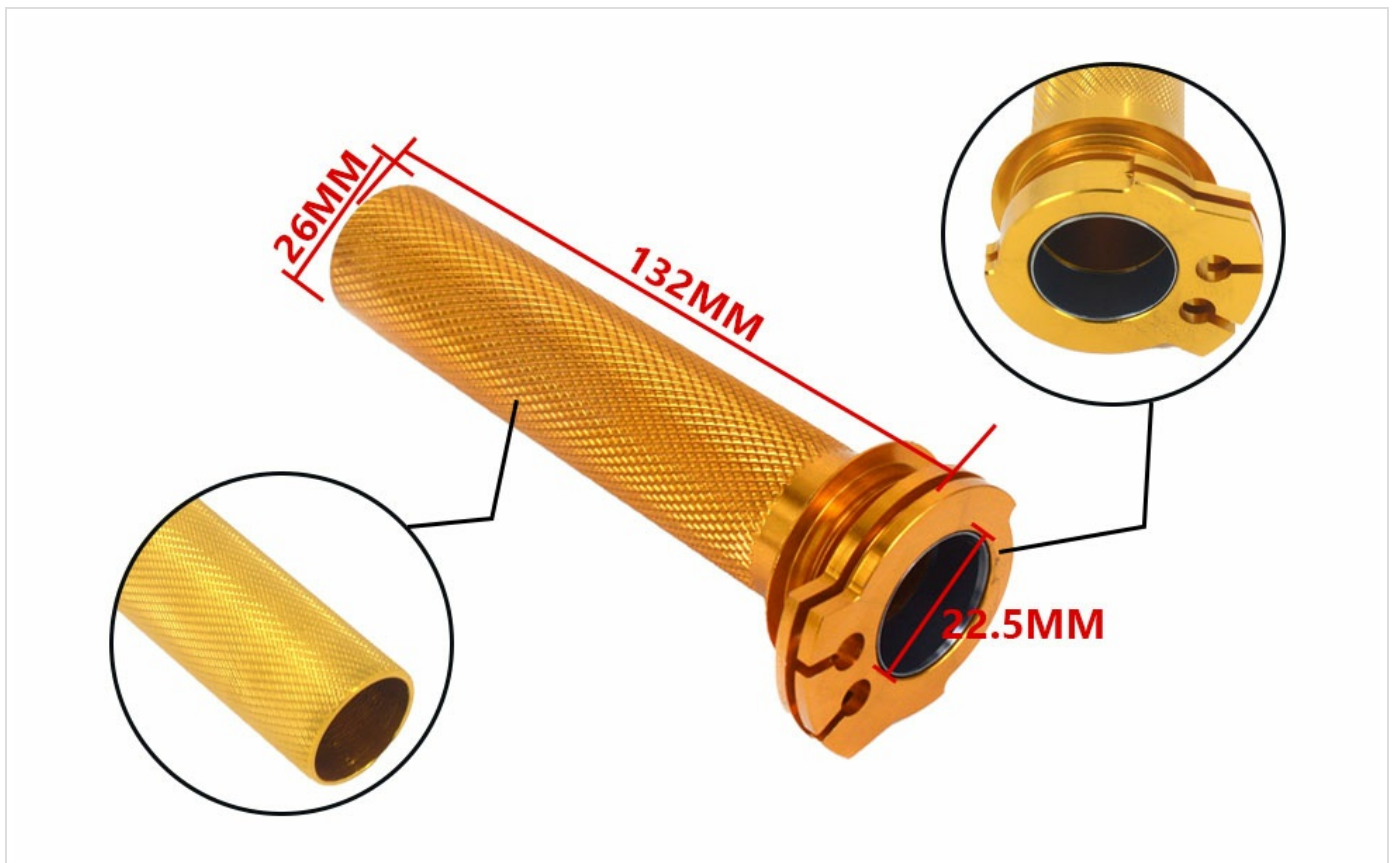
Detailed dimensions of the throttle tube, including length and diameter.
